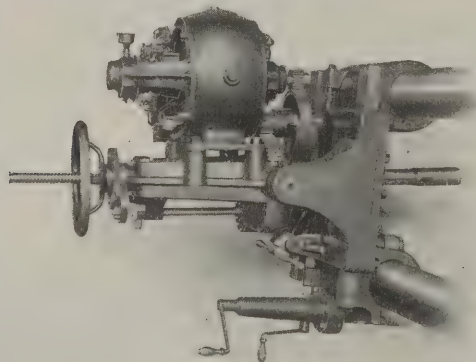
Spindle Driving Mechanism of Dallett Drill.
